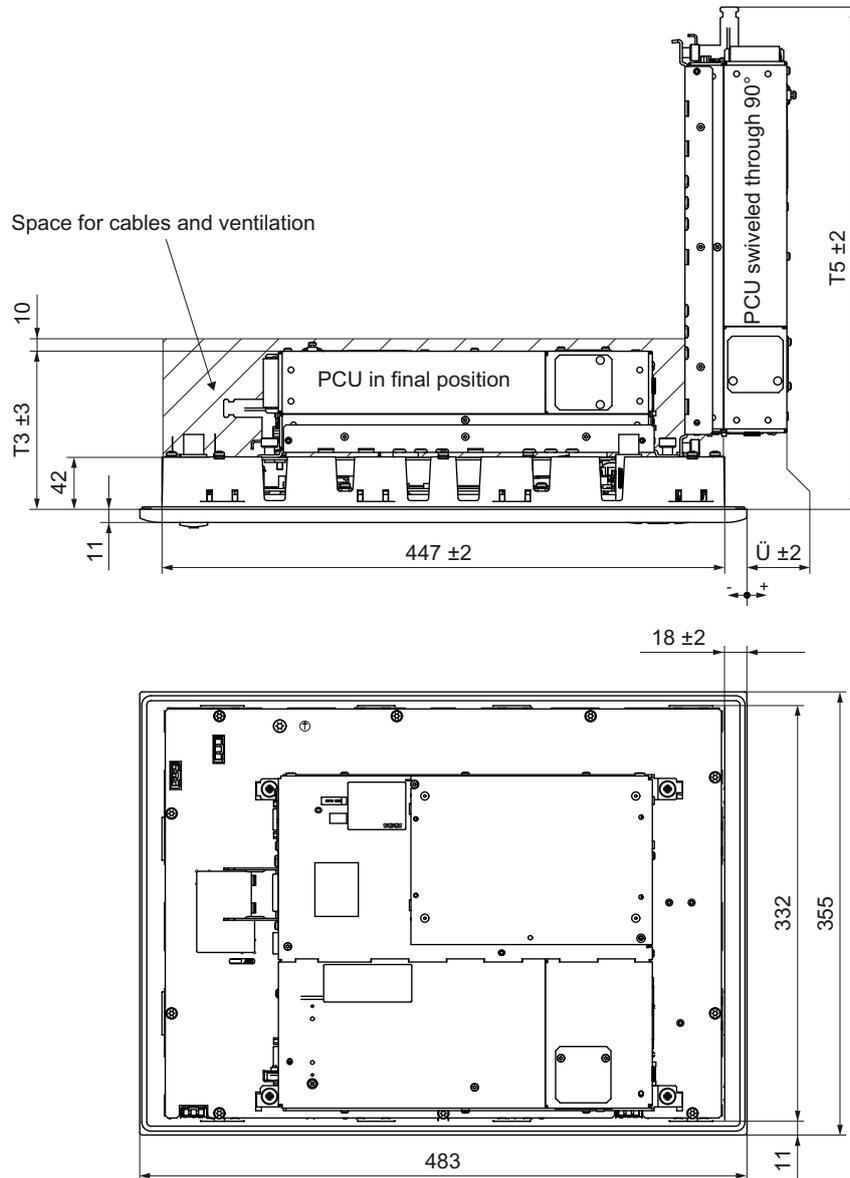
Attaching the PCU to the OP015A operator panel front
